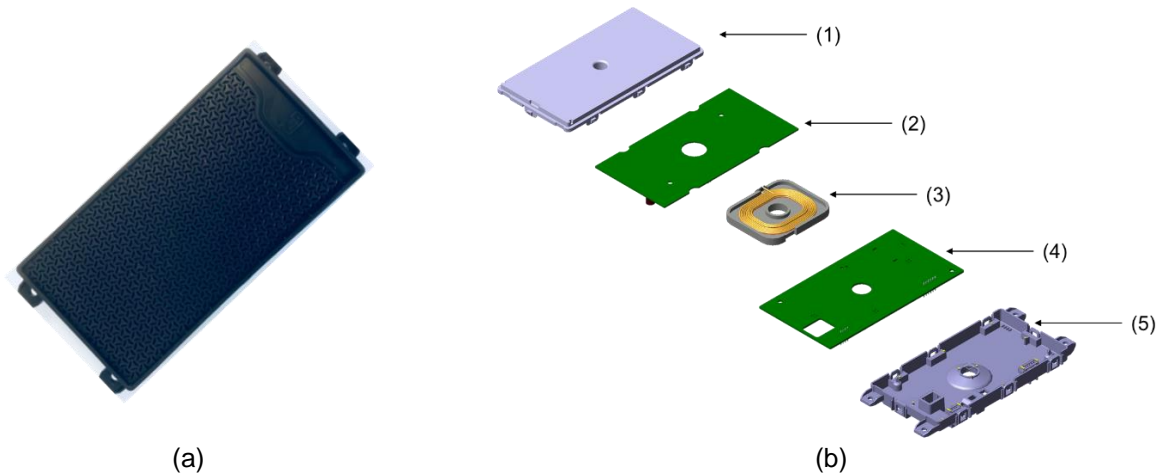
a) Manufactured wireless charger and b) Mechanical stack up
